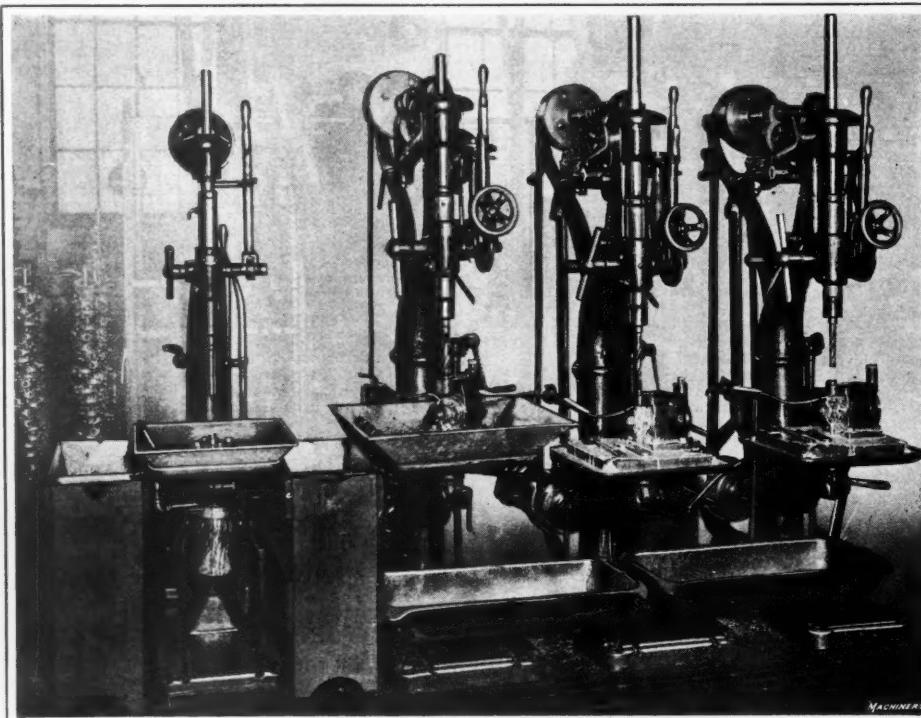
Vertical Drilling Machines built by the Rockford Drilling Machine Co., equipped with Indexing Fixtures for drilling Universal Joint Rings
